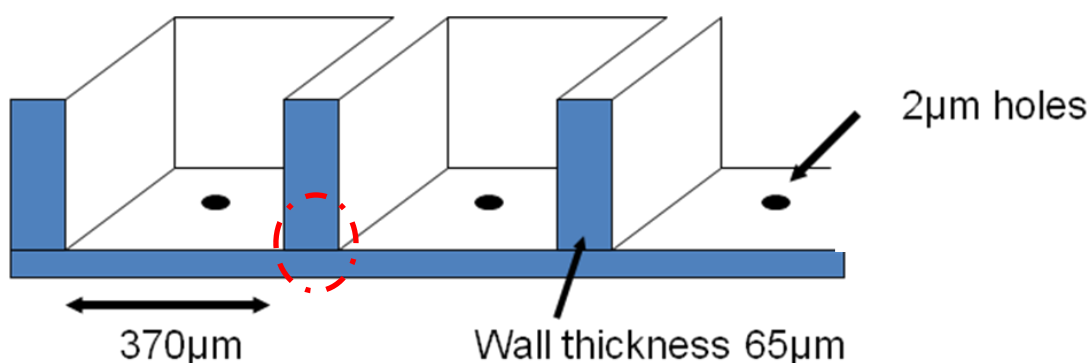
Section of a cell chip showing a drilled hole for patch clamping
